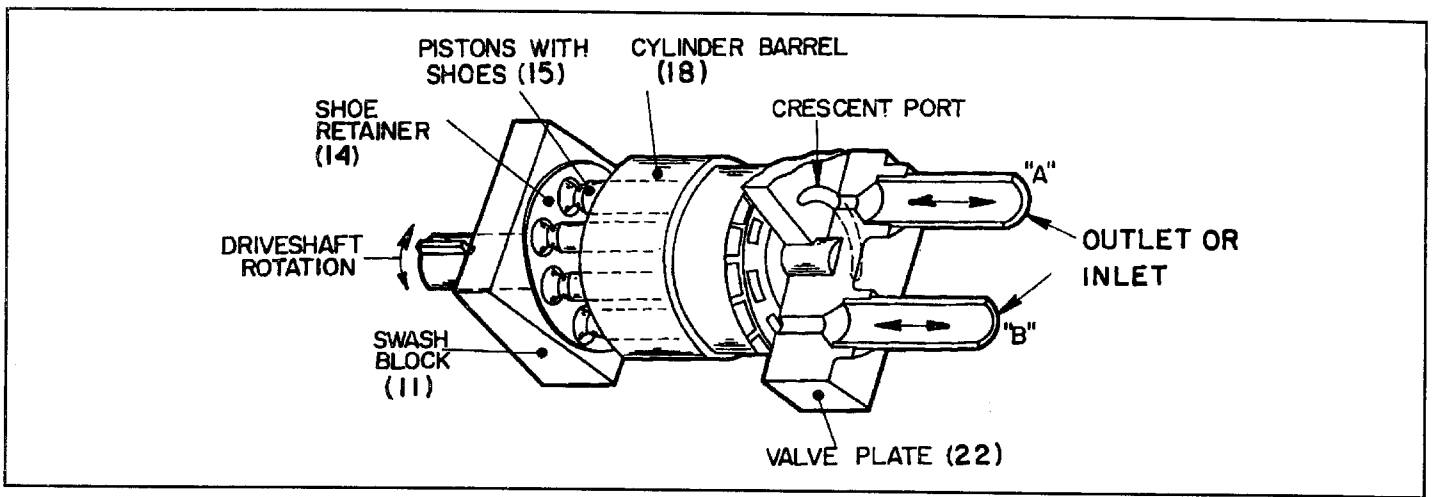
Oilgear "MFQ<sub>A</sub>" and "MFW" Rotating Mechanism Diagram Shown From Right Side of Motor (E51341).
